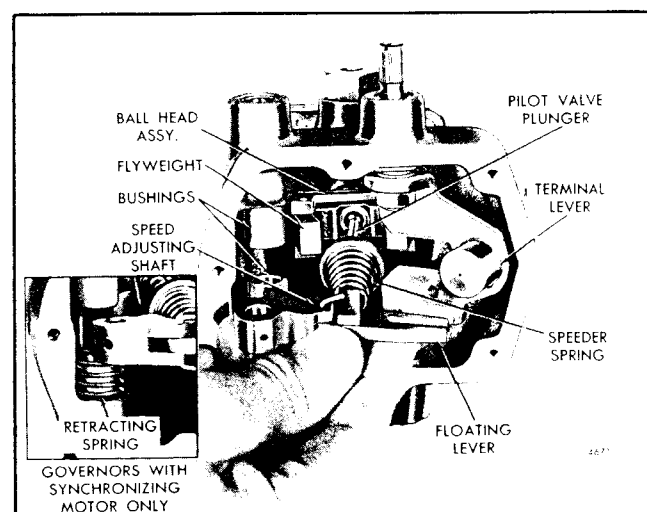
Installing Speed Adjusting Lever, Floating Lever, Speeder Spring and Pilot Valve Plunger Assembly
